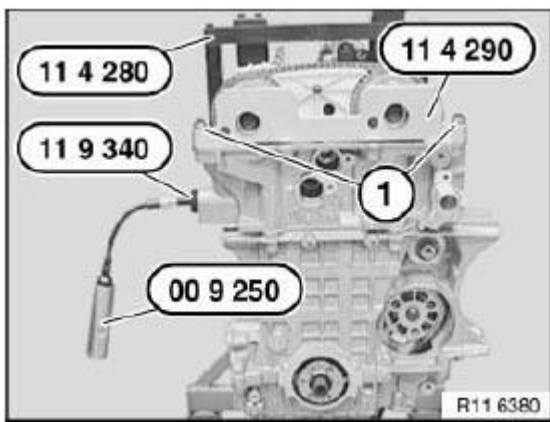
Identifying Bolts With Special Tools (11 4 280, 11 4 290, 11 9 340 And 00 9 250)
